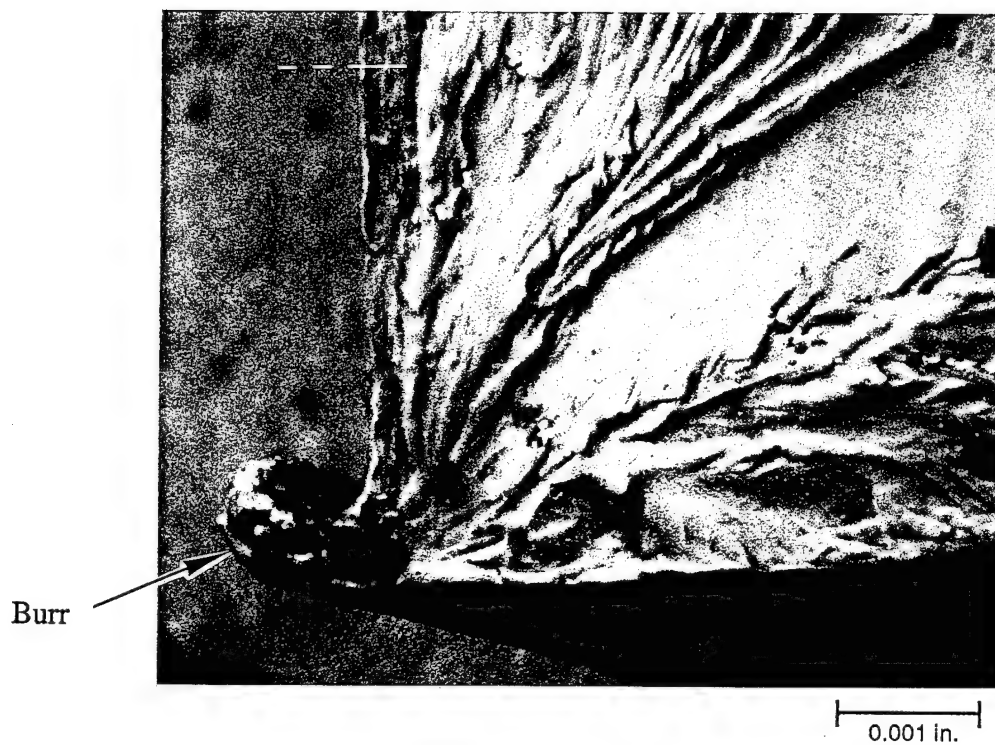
Fatigue initiation in open hole specimen from hole edge burr in *now material* for specimen which was not de-burred.
